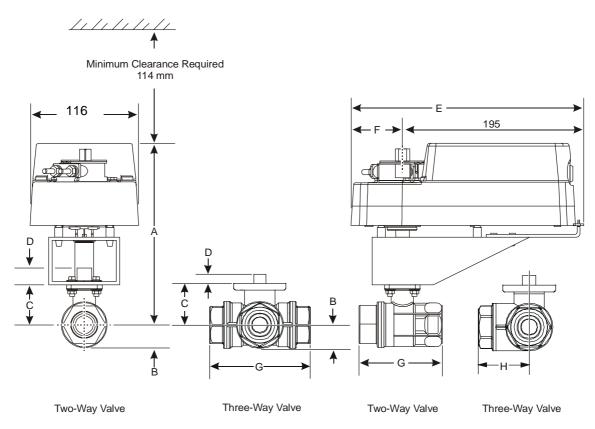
Spring Return M9216 actuated VG1000 Series ball valve with M9000-510-5 Linkage Dimensions, mm.
